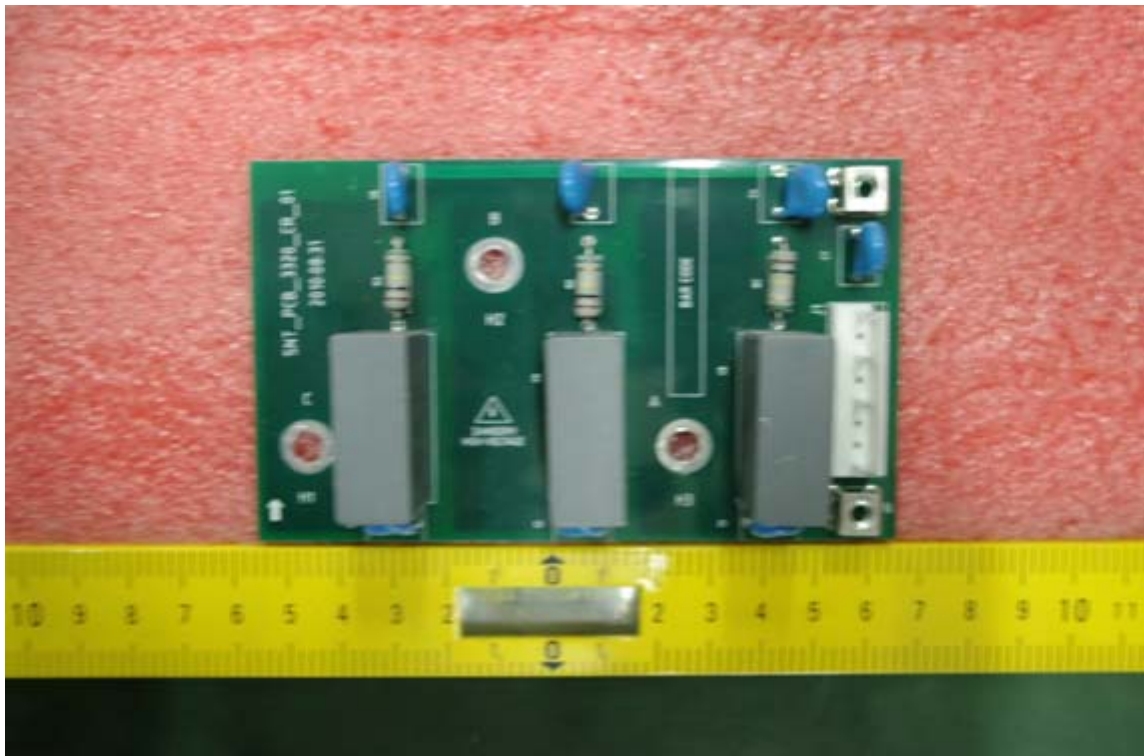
Board SNT\_PCB\_3320\_CR, components side view
